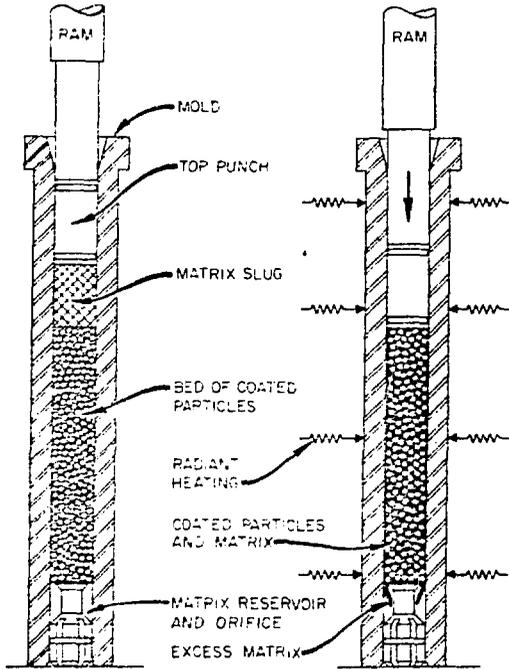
Fuel rod molding components and technique for making bonded fuel rods.
